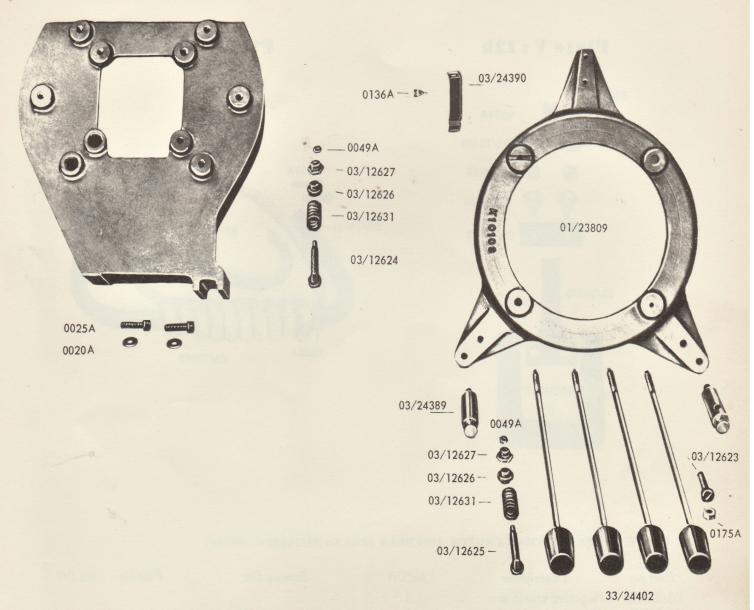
MIRROR HOLDER AND CONTROL RODS
